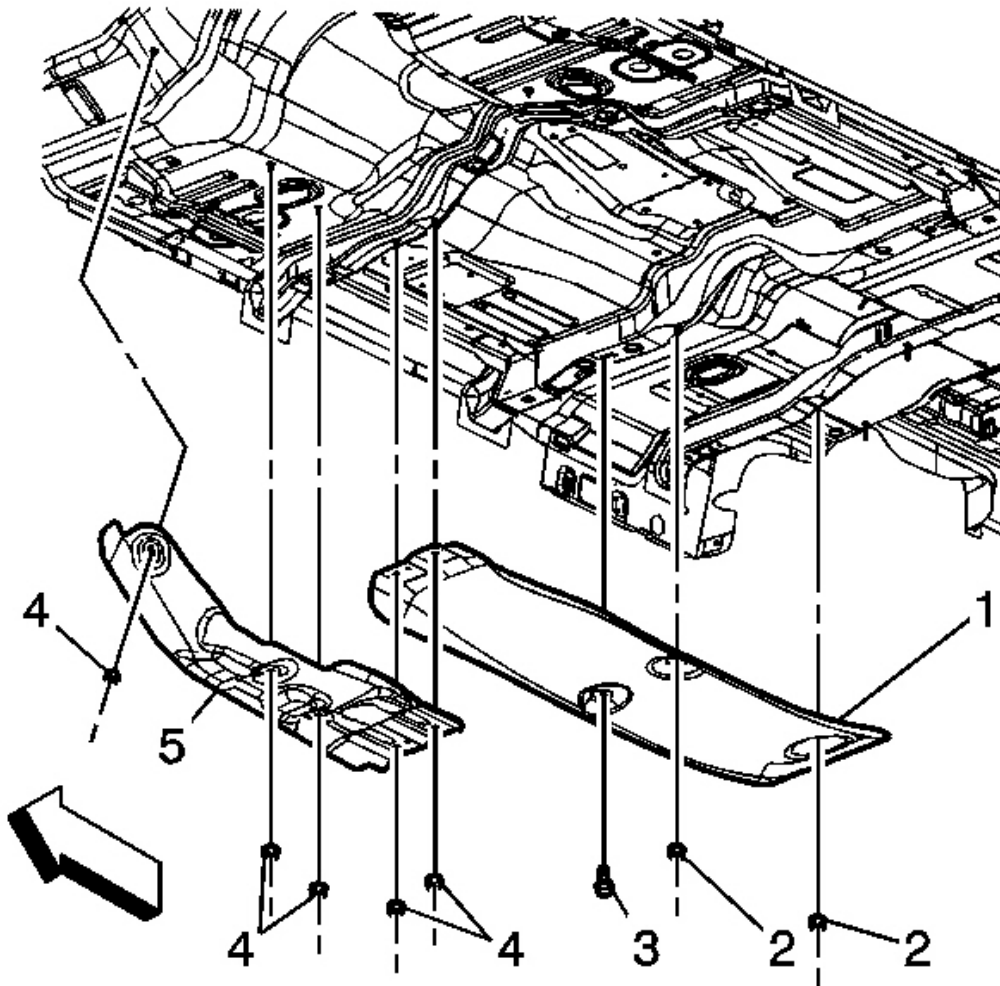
View Of Catalytic Converter Heat Shields & Nuts
